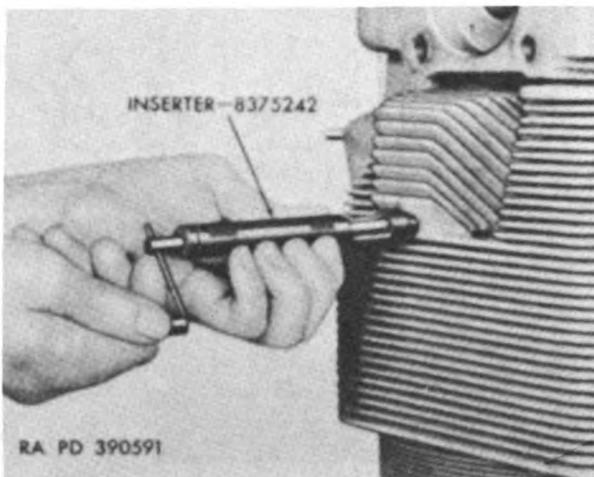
Installing shroud bolt Heli-coil threaded insert.
